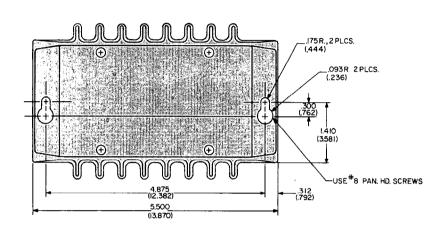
KI 201C/KI 211C INDICATOR OUTLINE AND MOUNTING DRAWING
